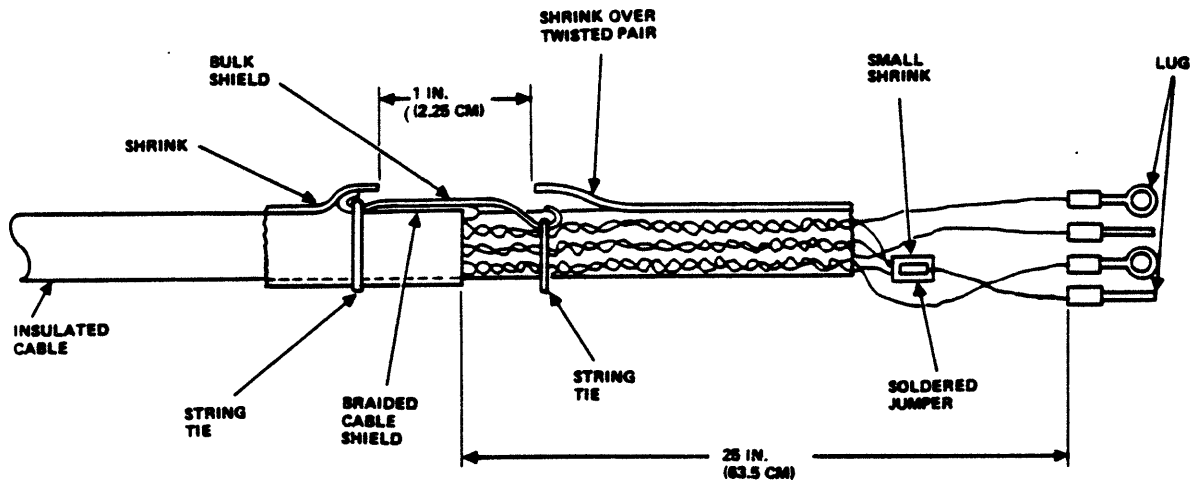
Eight-Channel CLA Customer-Fabricated Signal Cable Assembly, Backplane Connector Installation
